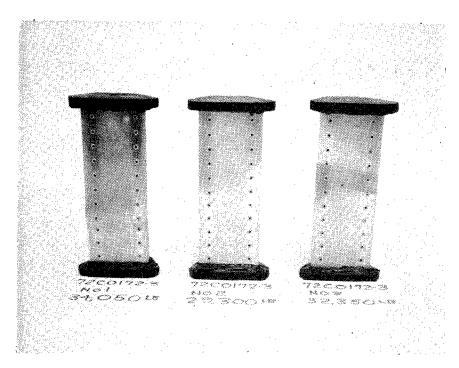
Failed Rivet Crippling Specimen Skin Side (Neg. 126986B)
